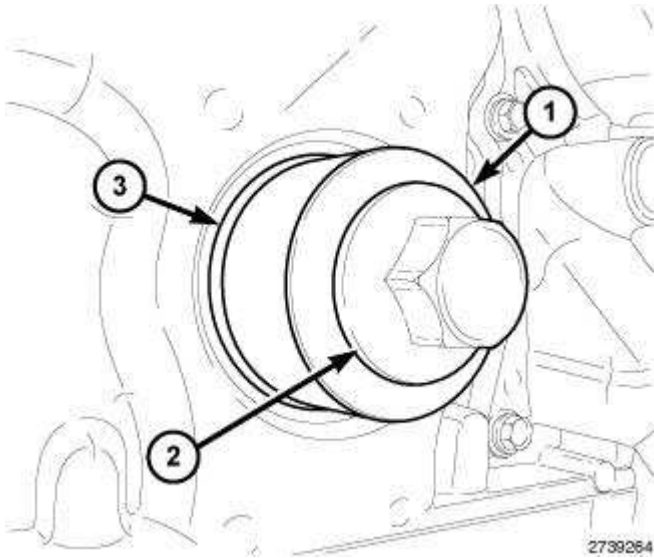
Front Crankshaft Seal Installer & Oil Seal
